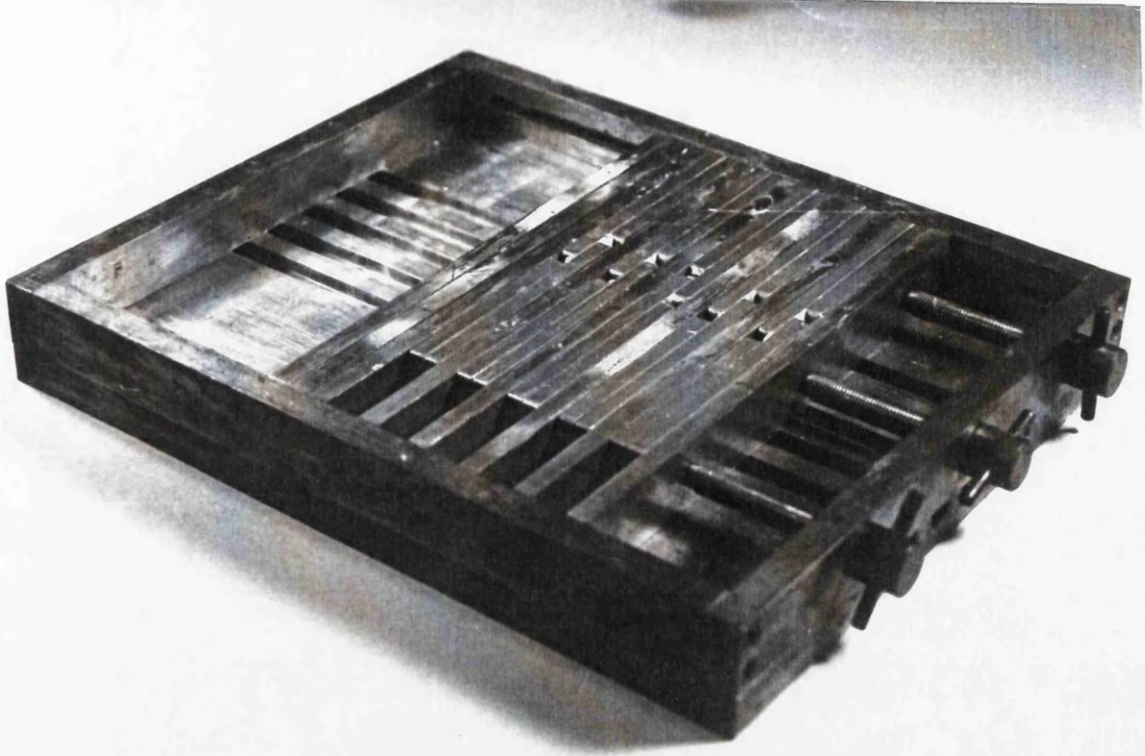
ASSEMBLY JIG FOR LAP SHEAR SPECIMENS
